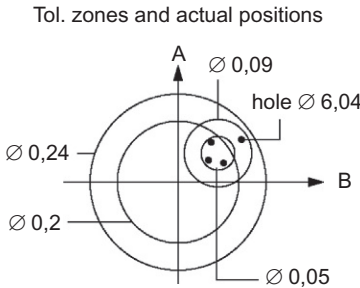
Position deviations and tolerance templates for a workpiece according to Fig. 13.85; the part is to be accepted
